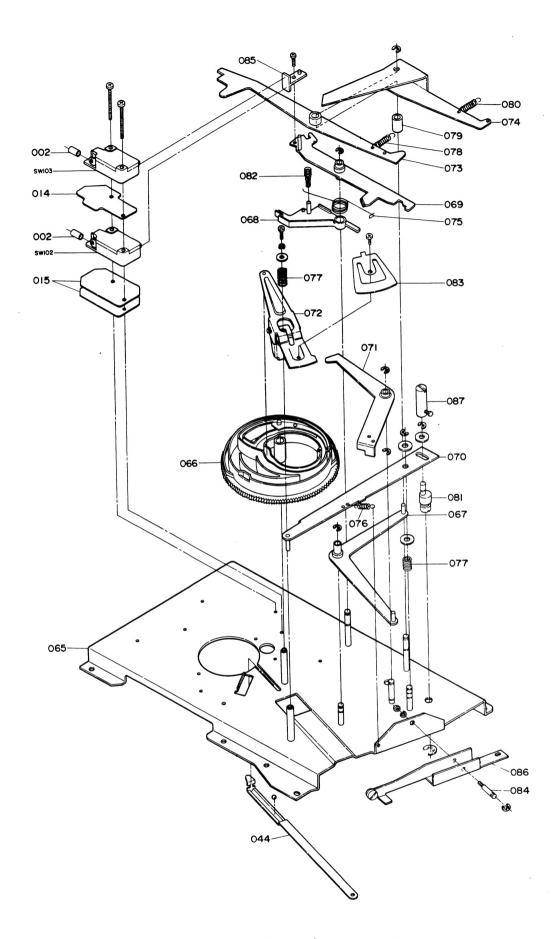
PLAYER EXPLODED VIEW (Sub-Chassis)
